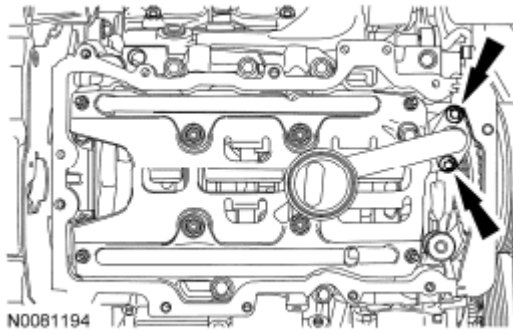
Locating Oil Pump Screen & Pickup Tube With Bolts
